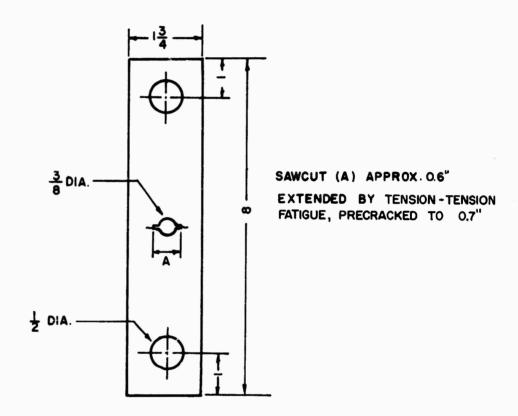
CENTER PRECRACKED NOTCH TENSILE SPECIMEN
